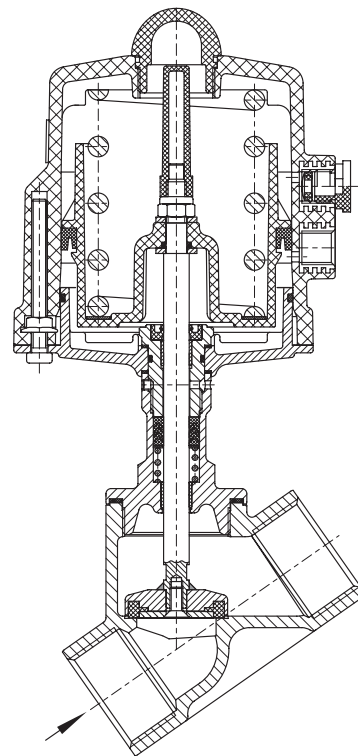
Type 3353 Angle Seat Valve Actuator with fail-safe action: fail-close
